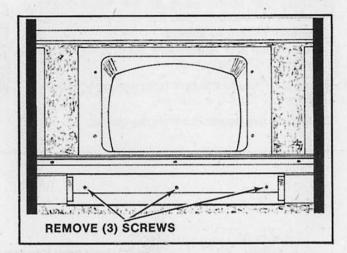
Removing Black Light Tube Mtg. Brkt. — Upright
